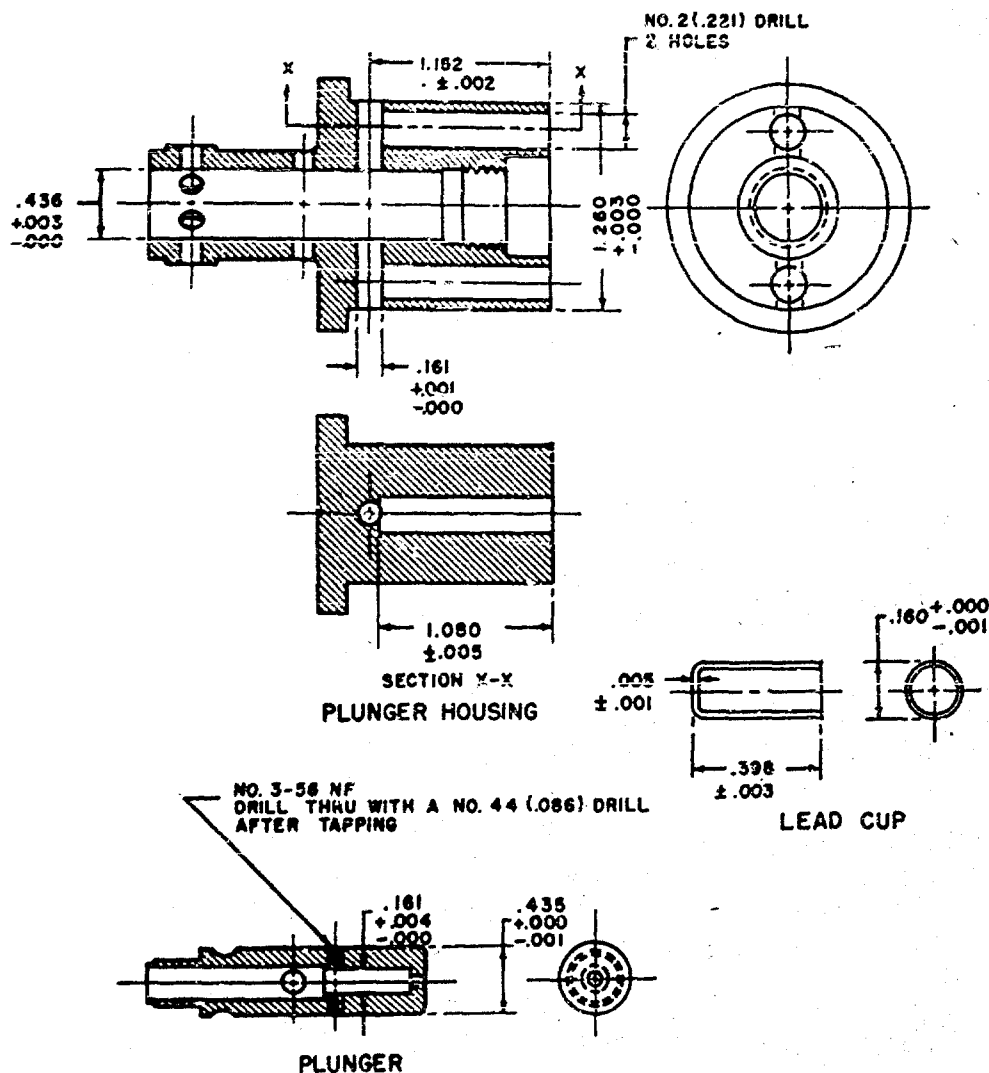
Dimensions and Tolerances of the Lead Holes, Lead Cup, and Related Parts of the Firing Train of the Fuze Shown in Figure 6-8.
